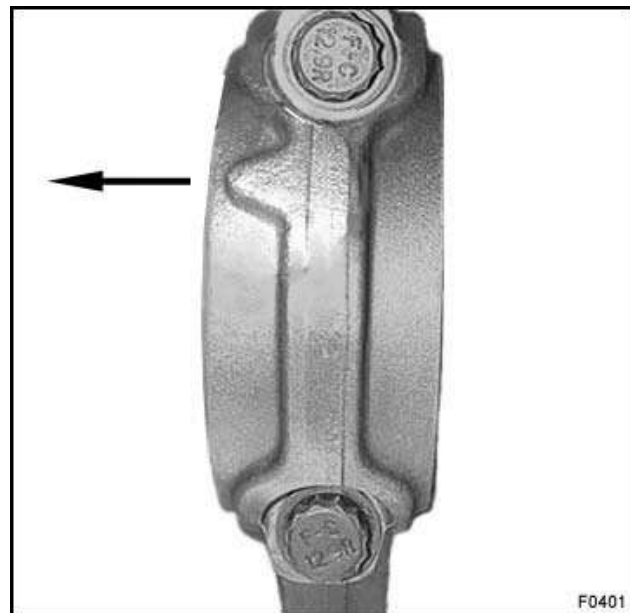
Connecting rod cap with M12 connecting rod cap bolts (protrusion points to front of engine)
